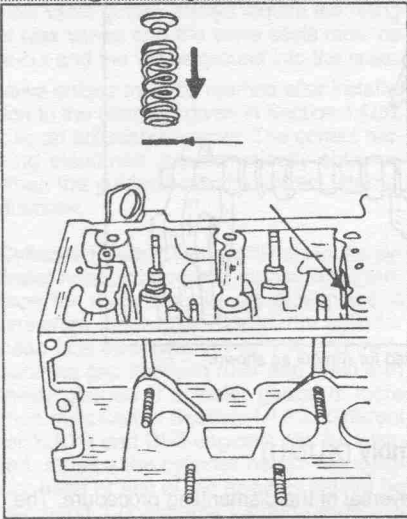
Fitting the component parts of a valve. Note the washer underneath each valve spring.
